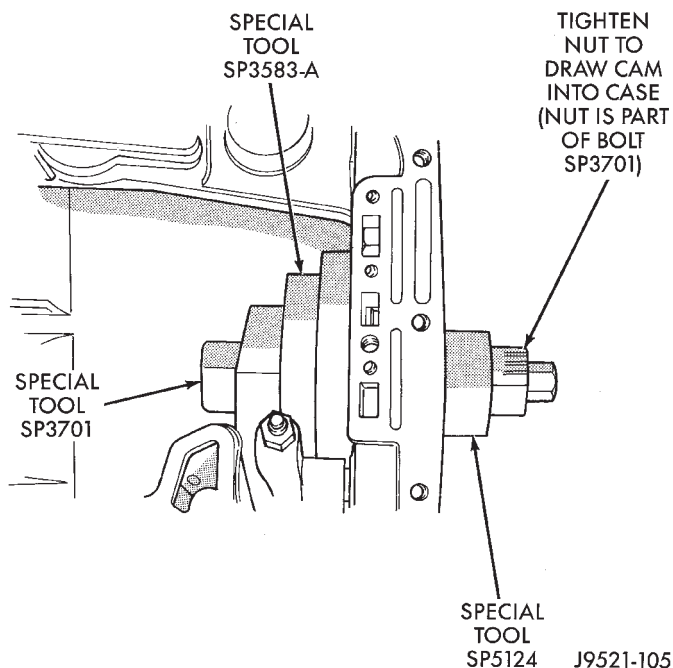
Pressing Overrunning Clutch Cam Into Case
